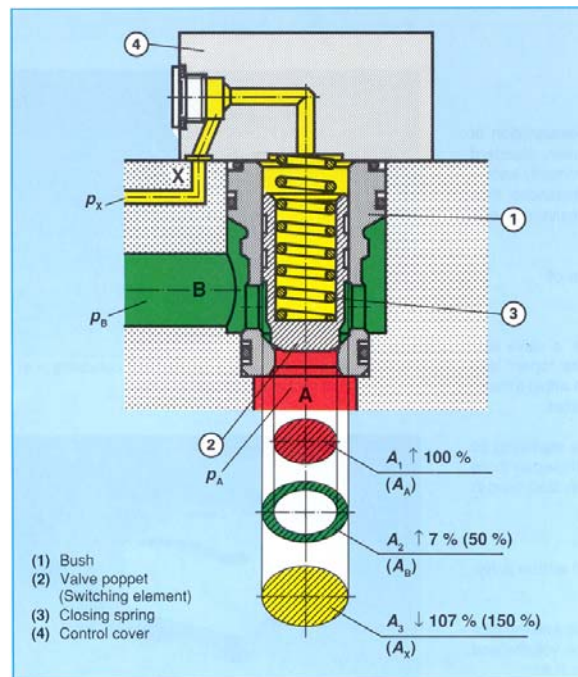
2-Way Cartridge Valve sectional drawing
